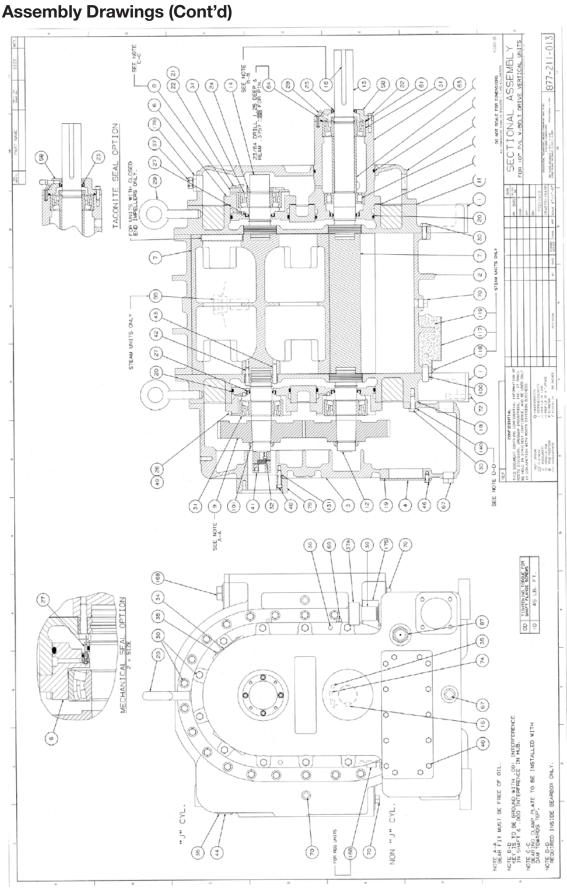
Assembly of 10" Vertical Blower with V-Belt Drive
